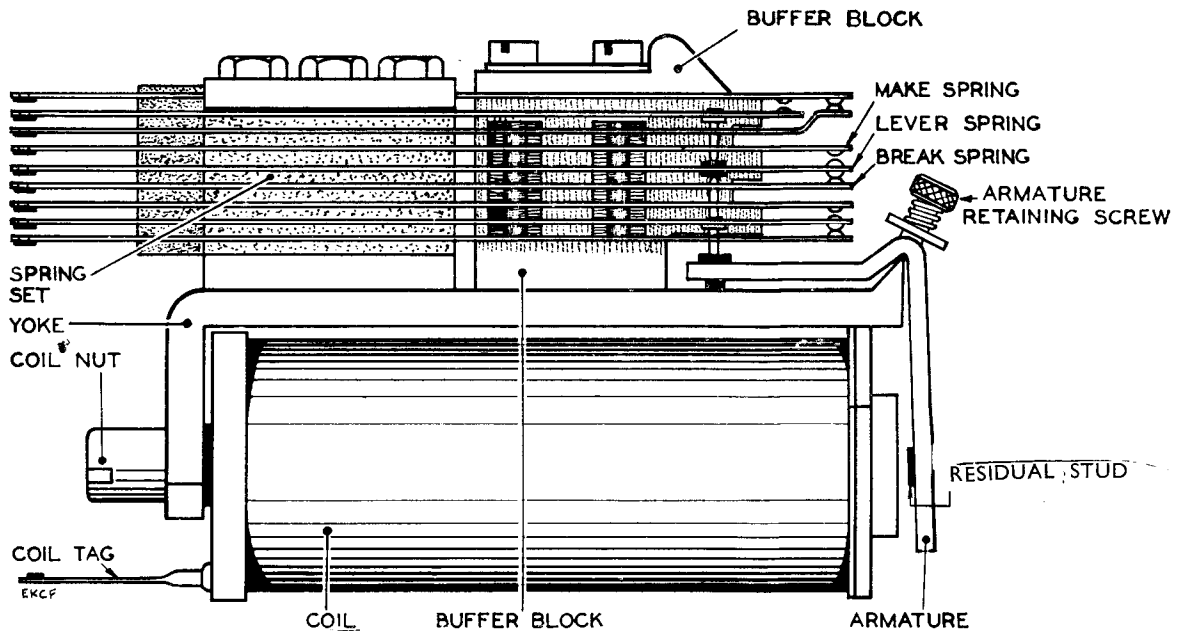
(b).—SIDE VIEW OF 3,000-TYPE RELAY
